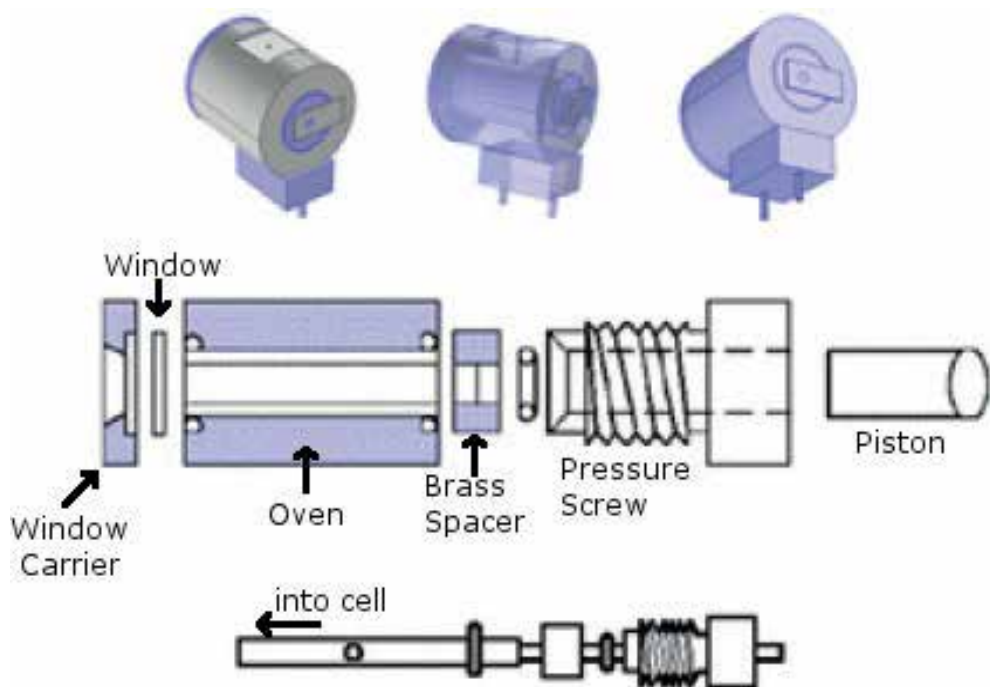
Top: Ventacon H4-200 heat cell. Middle: Cross sectional layout of oven. Bottom: Cylindrical powdered/solid sample holder.
